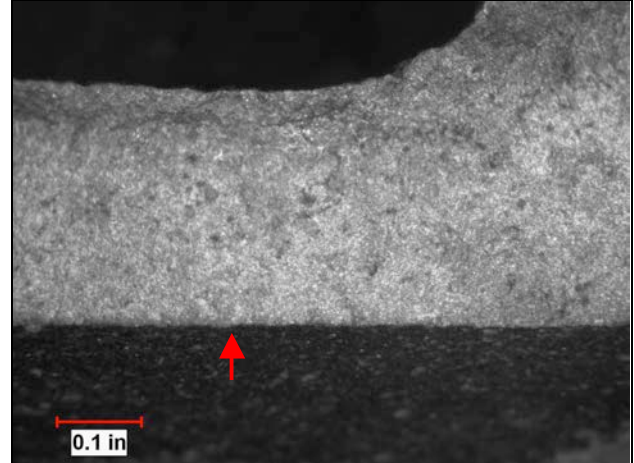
Close-up view of exposed fracture. The arrow indicates the inside pocket surface. Mag: 7X
